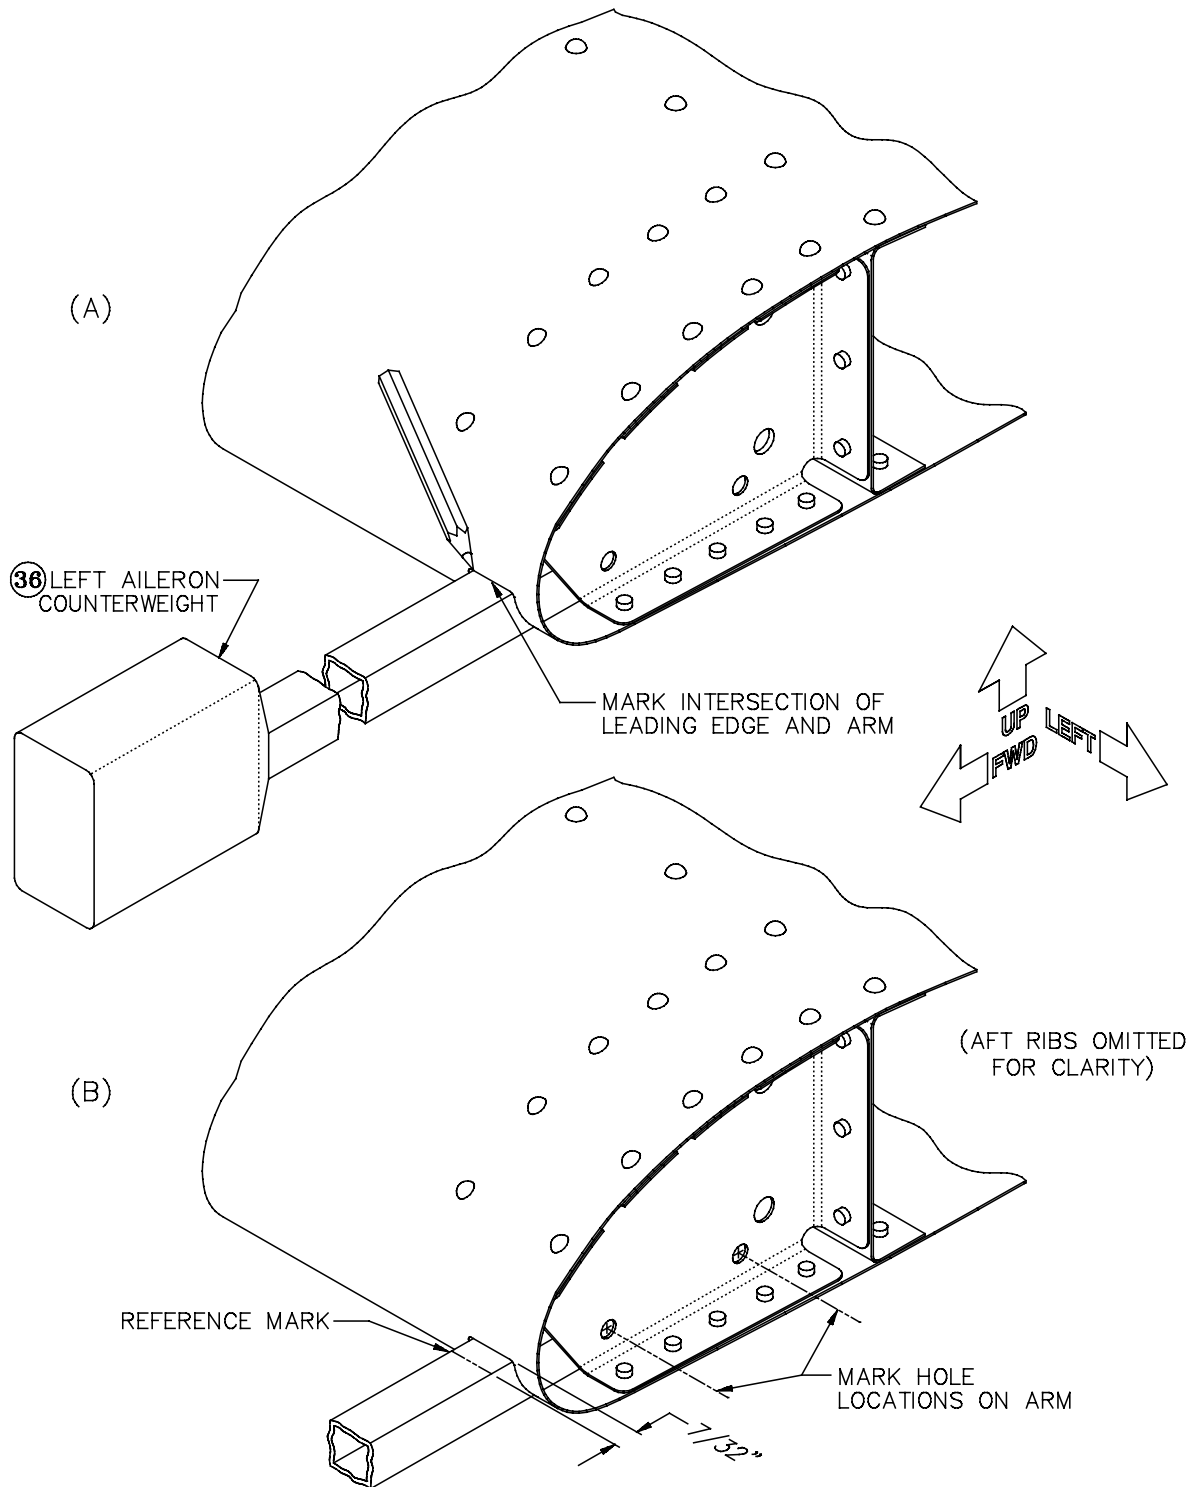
Drilling the Mounting Bolt Holes in the Counterweight Arms
